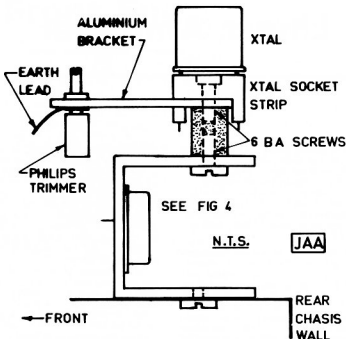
SIDE VIEW OF COMPLETED ASSEMBLY
